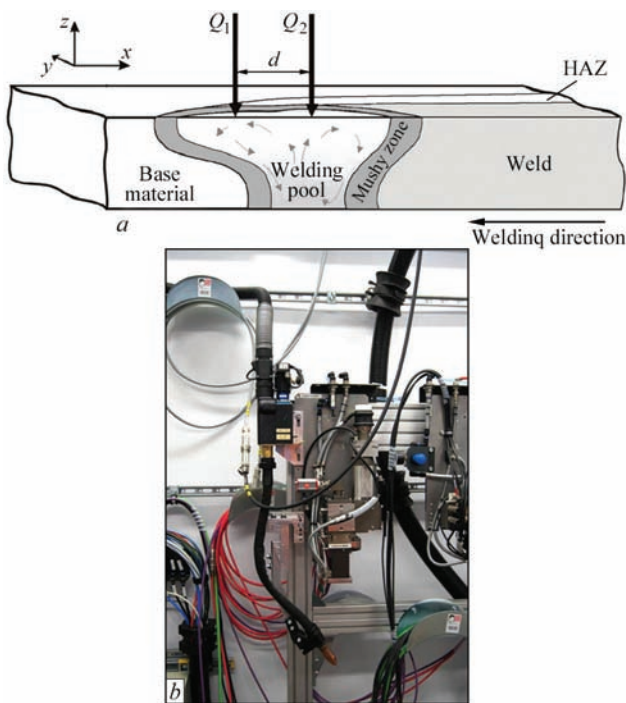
Scheme of hybrid welding process (a), hybrid laser head Yb: YAG + MIG (b)
